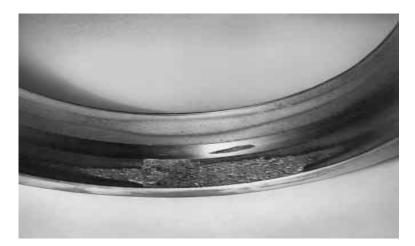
Flaking in the outer ring outer ring of spherical roller bearing that has been mounted in a housing with oval bore
